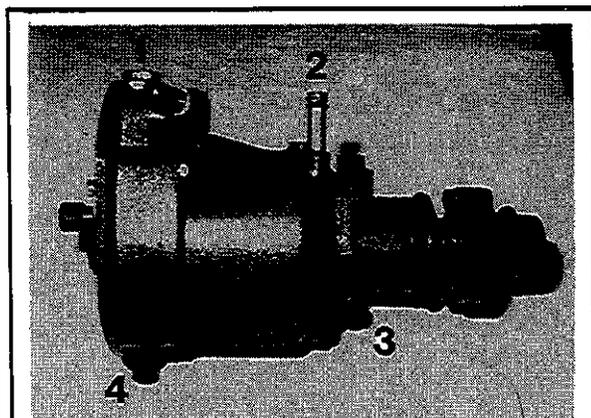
RB type reduction-reverse gear, ratio 1.9 :1
